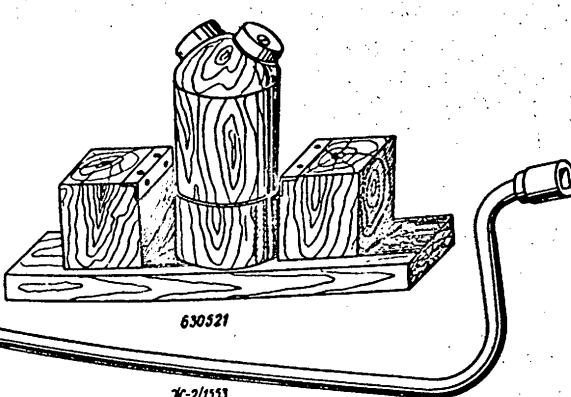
TOOLS AND FIXTURES FOR CYLINDER ASSEMBLY
